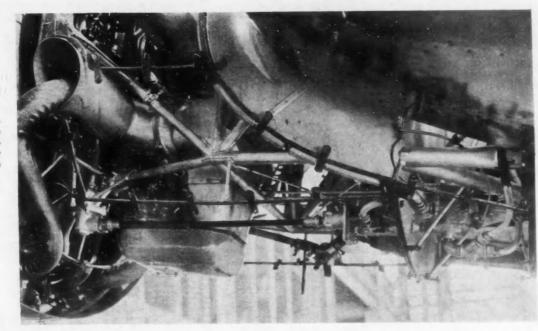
Actual installation of simple fuel system with lowered pump driven by flexible shaft, shown in Fig. 2
